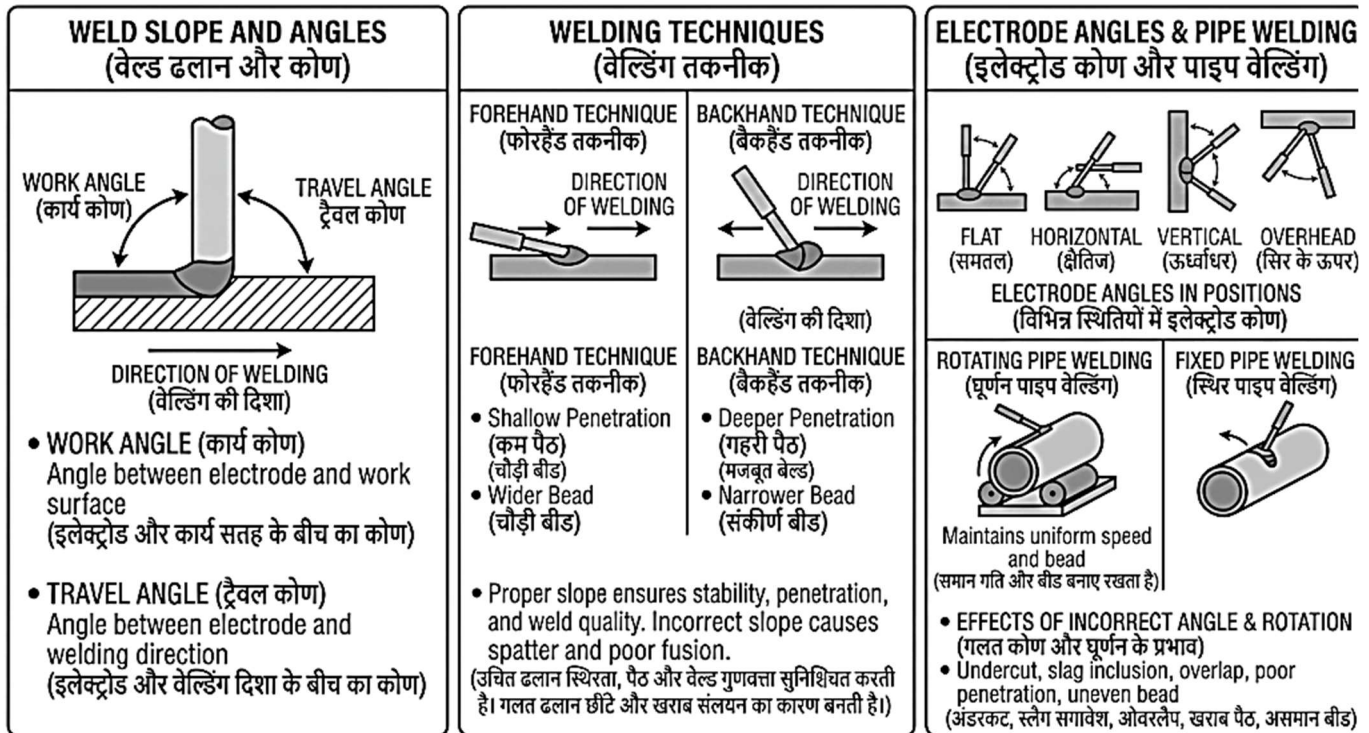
Weld Angles and Welding Techniques | वेल्ड कोण एवं वेल्डिंग तकनीकें
